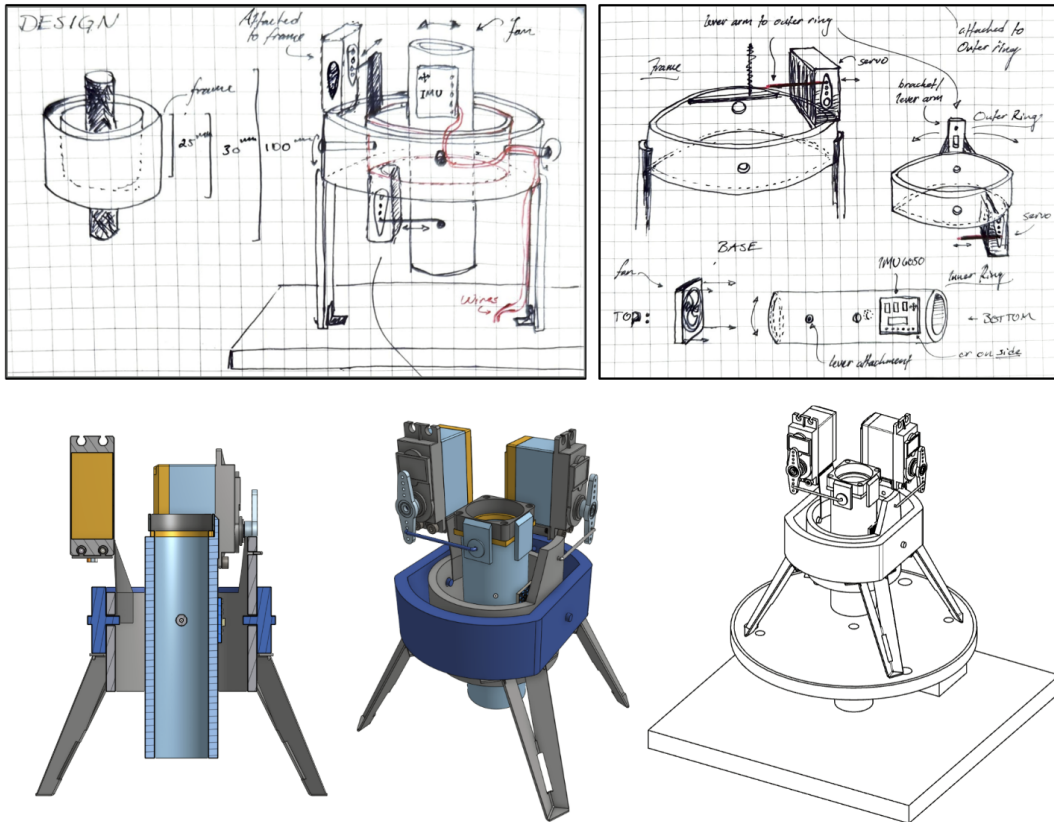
Full assembly design sketch, showing frame, outer ring, base, and wiring routing with corresponding cad model and drawing.
